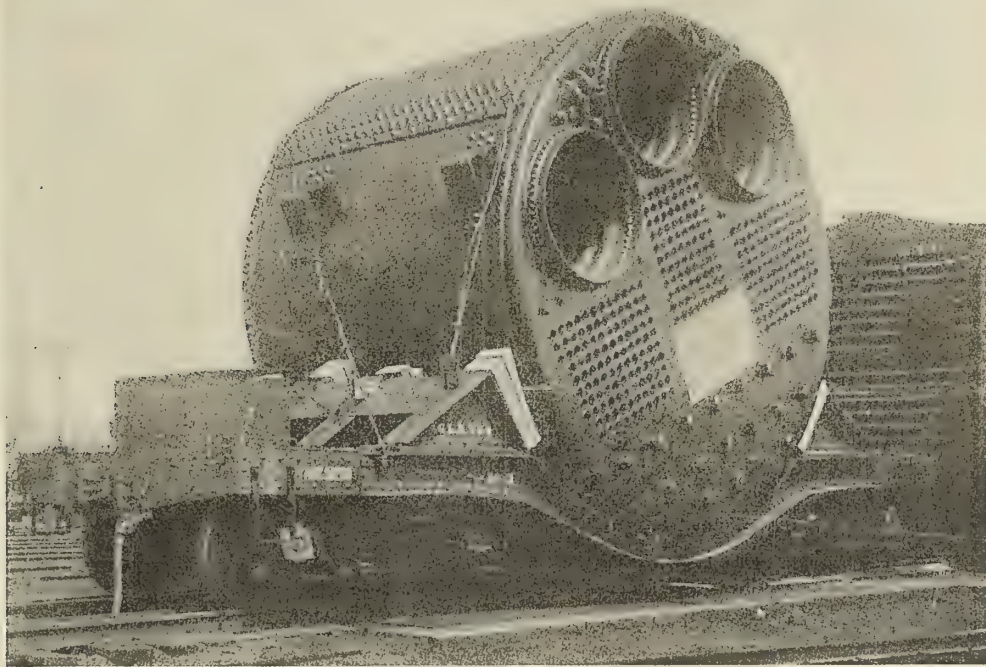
Special Flat Car for Shipping Scotch Boilers
